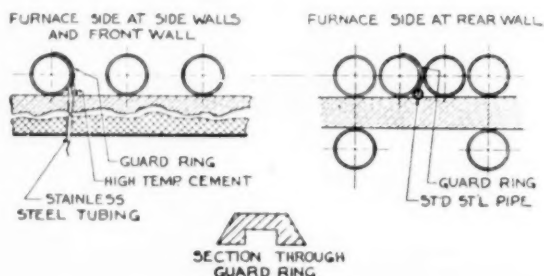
DETAILS OF TUBE-SURFACE THERMOCOUPLES
